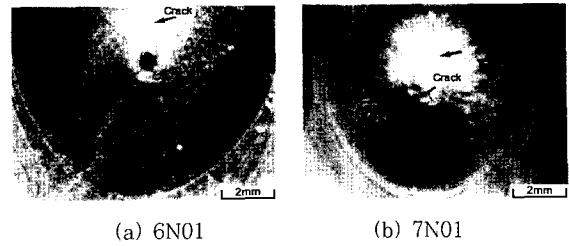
Macrophotographs of crater crack in (a) 6N01 and (b) 7N01 welds in welding current 100A of AC-GTAW with He gas
